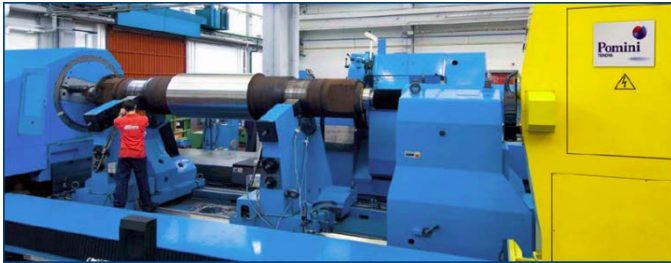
A roll grinding machine (courtesy of TENOVA S.p.A.)
